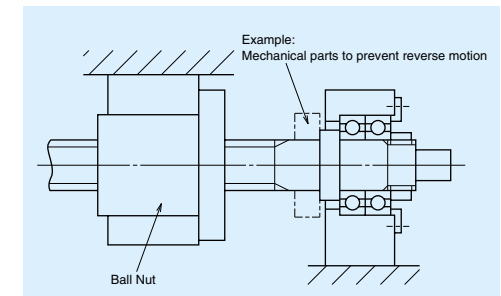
3 Nut and ball screw are required to be separated when installing in this structure.
